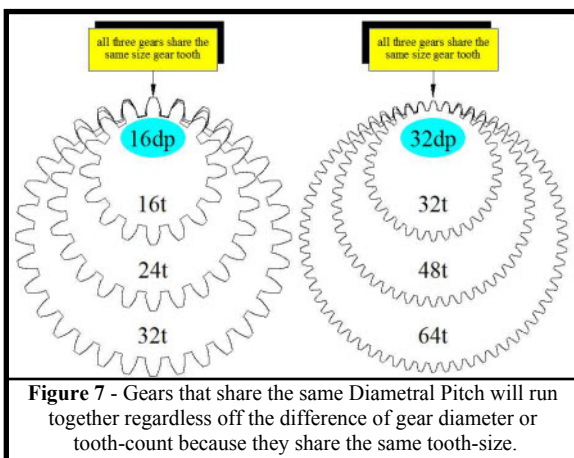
clearly shows that the set of gears on the right side have teeth that are much smaller in size than those on the left side making it IMPOSSIBLE for them to mesh together. As stated, all gears that run together MUST be made using the same Diametral Pitch, and any two gears, no matter the size, can run together as long as they both share the same Diametral Pitch. Since Diametral Pitch has everything to do with the physical size of the tooth, the actual choice made to determine what Diametral Pitch to use for a given application would then have to be determined based upon the needed strength of the individual gear tooth itself and that, again, would be outside the scope of this tutorial.
